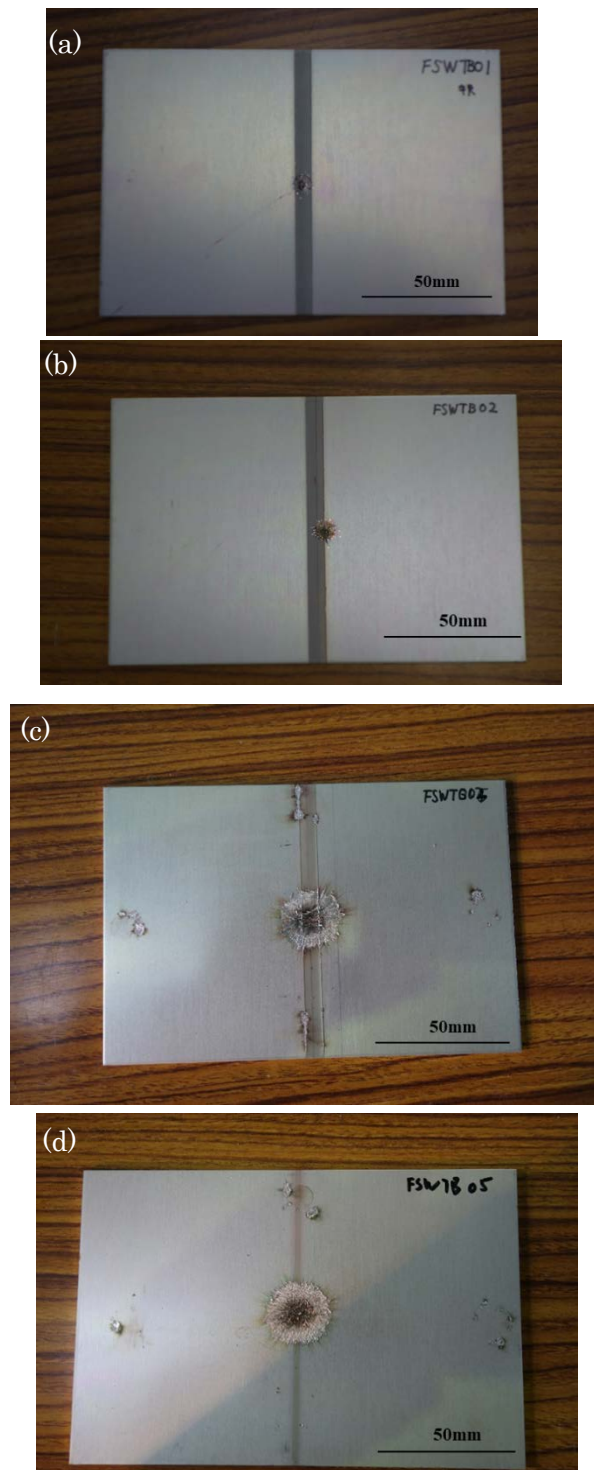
Lightning damage on FSW joint (a) SZ on Tool side, 10kA, (b) HAZ on Tool side, 10kA, (c) SZ on Tool side, 40kA, (d) SZ on the Root side, 40kA
